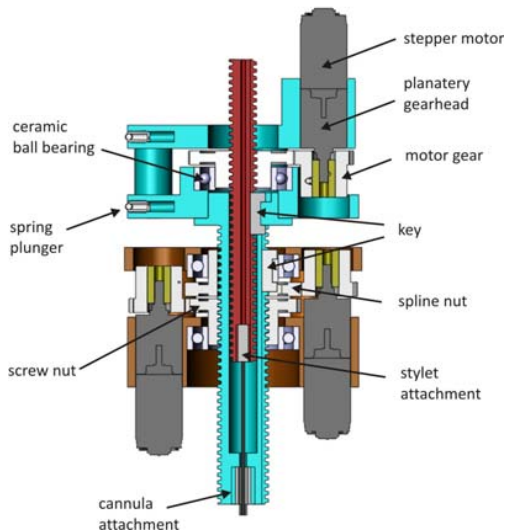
Section view of the drive mechanism. A spline nut and screw nut engage the spline and threads of the screw-spline respectively. Another threaded nut engages the screw that rides inside the screw-spline. The nuts are bonded to the inside race of ceramic ball bearings and have teeth that engage spur gears on the corresponding gearhead shafts.
